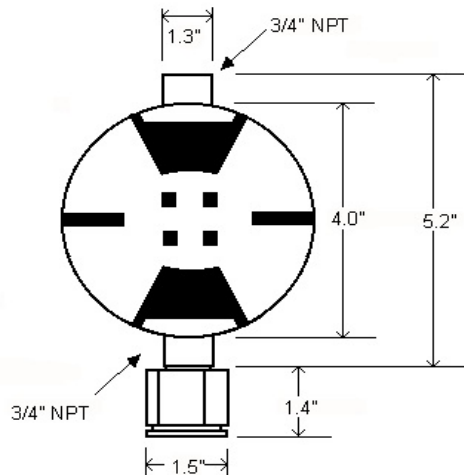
Dimensions for JB2 and CB4 Sensor Separation Assembly with SC1100 (LEL) Sensor
